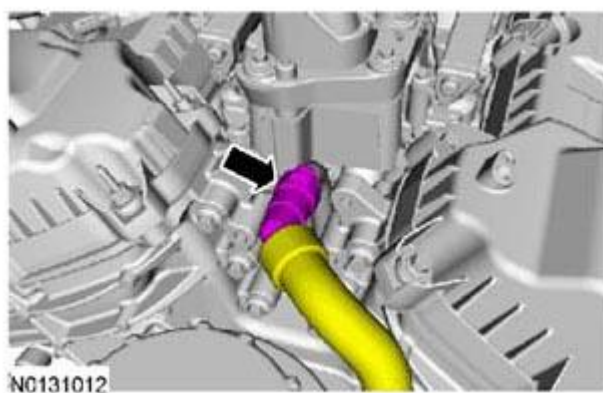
Locating Bolts Of Oil Pump Screen And Pickup Tube
